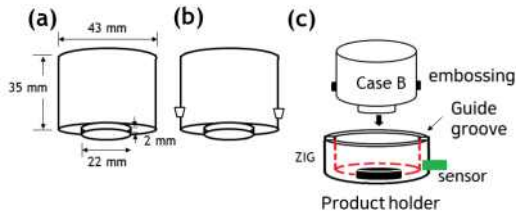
(a), (b) Shape and size of magnetic switch case A and B (c) Jig model of inspection equipment for gate classification
